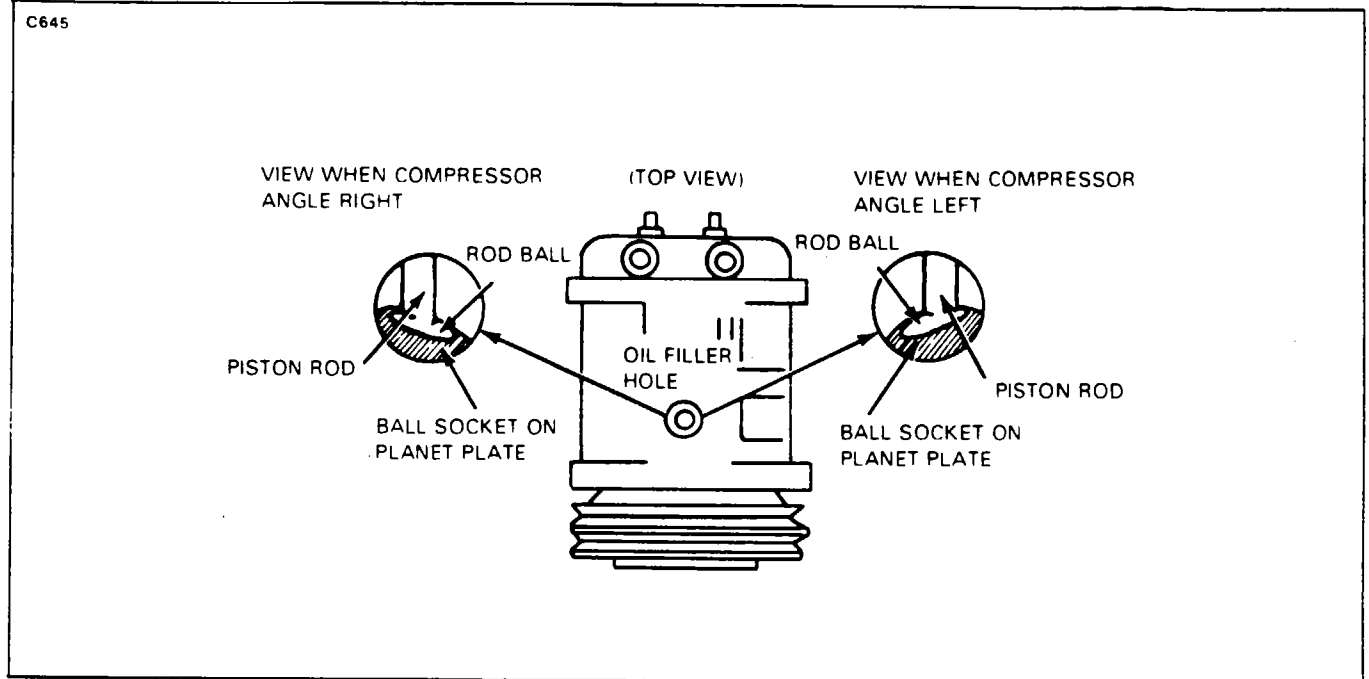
Positioning Sankyo Compressor Internal Parts
